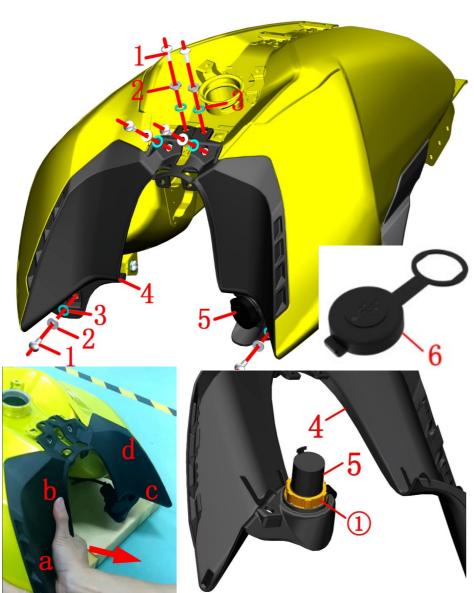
FUEL TANK COVER COMPONET		Fuel tank front trim cover	CHK	(0)
